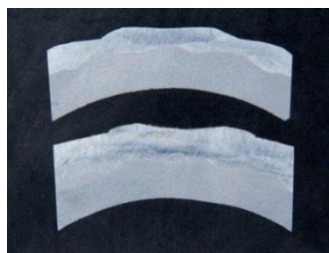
Transversal macro section single and double weld overlay welded with GMAWP 1 layer 5,56 %, 2 layer 0,47 % Fe content
